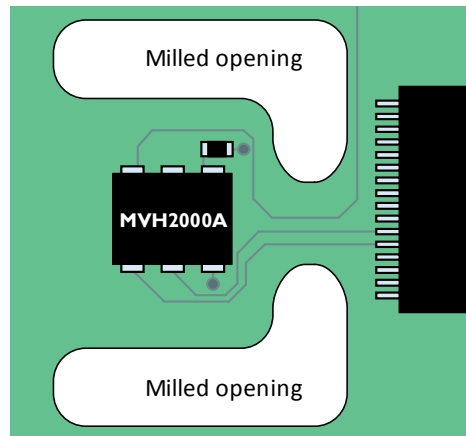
Thermal isolation of sensor using milled PCB openings.
